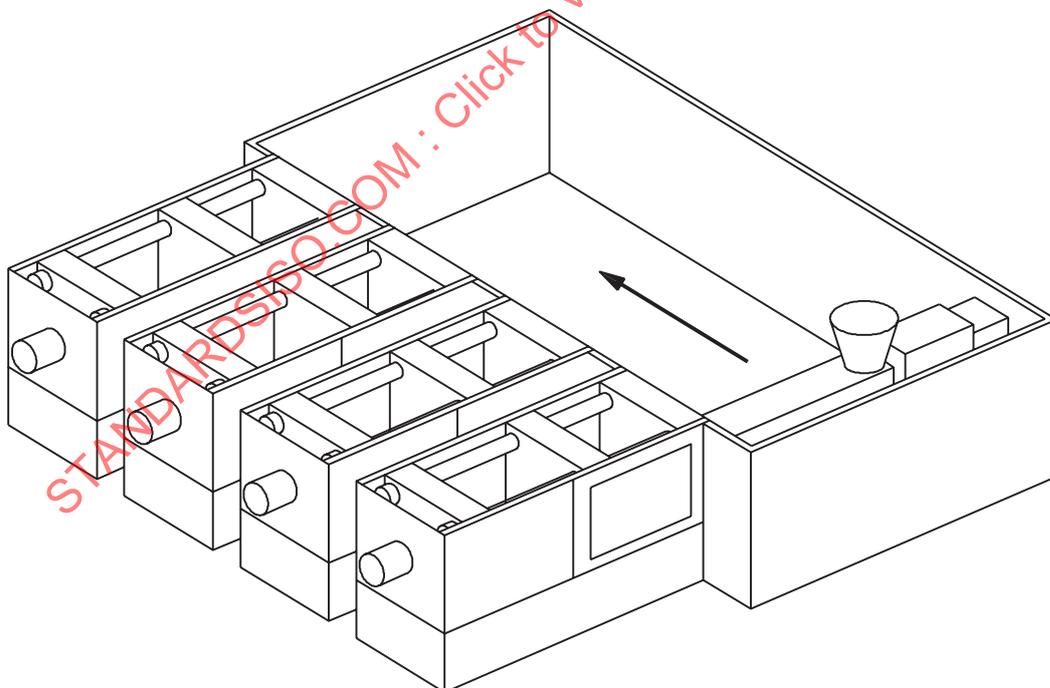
Example of multi-station machine with mobile injection unit, shown with guards for the clamping units
